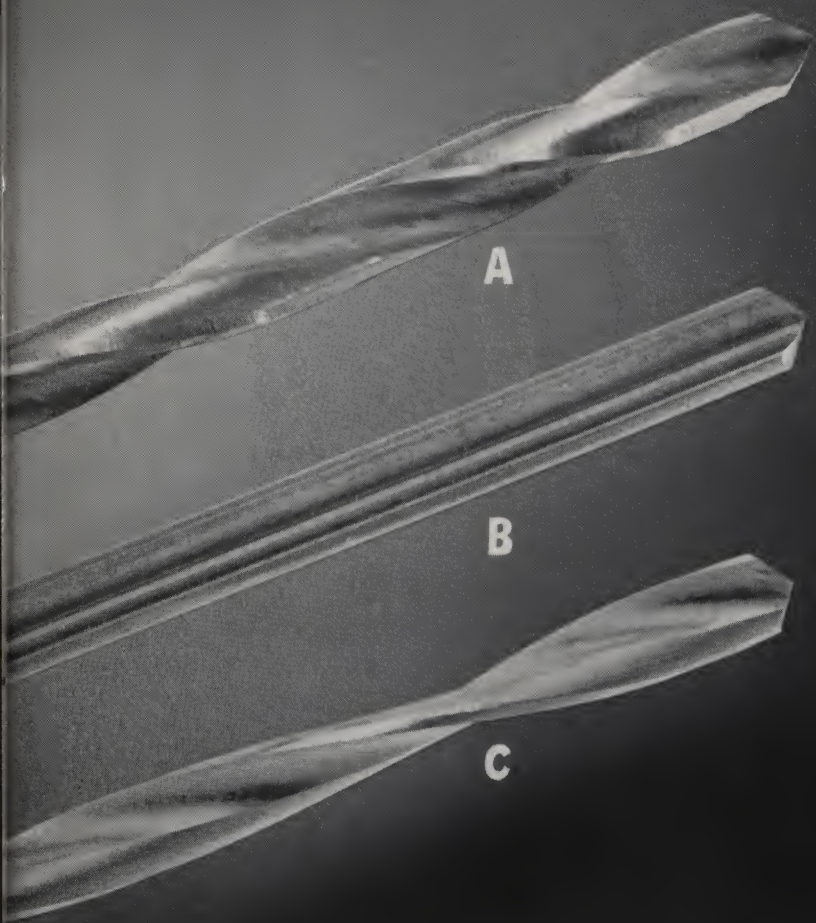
AUTOMATIC SCREW MACHINE DRILLS: (A) *Standard drill*; (B) *straight-fluted drill*; (C) *drill with large chip clearance*.
